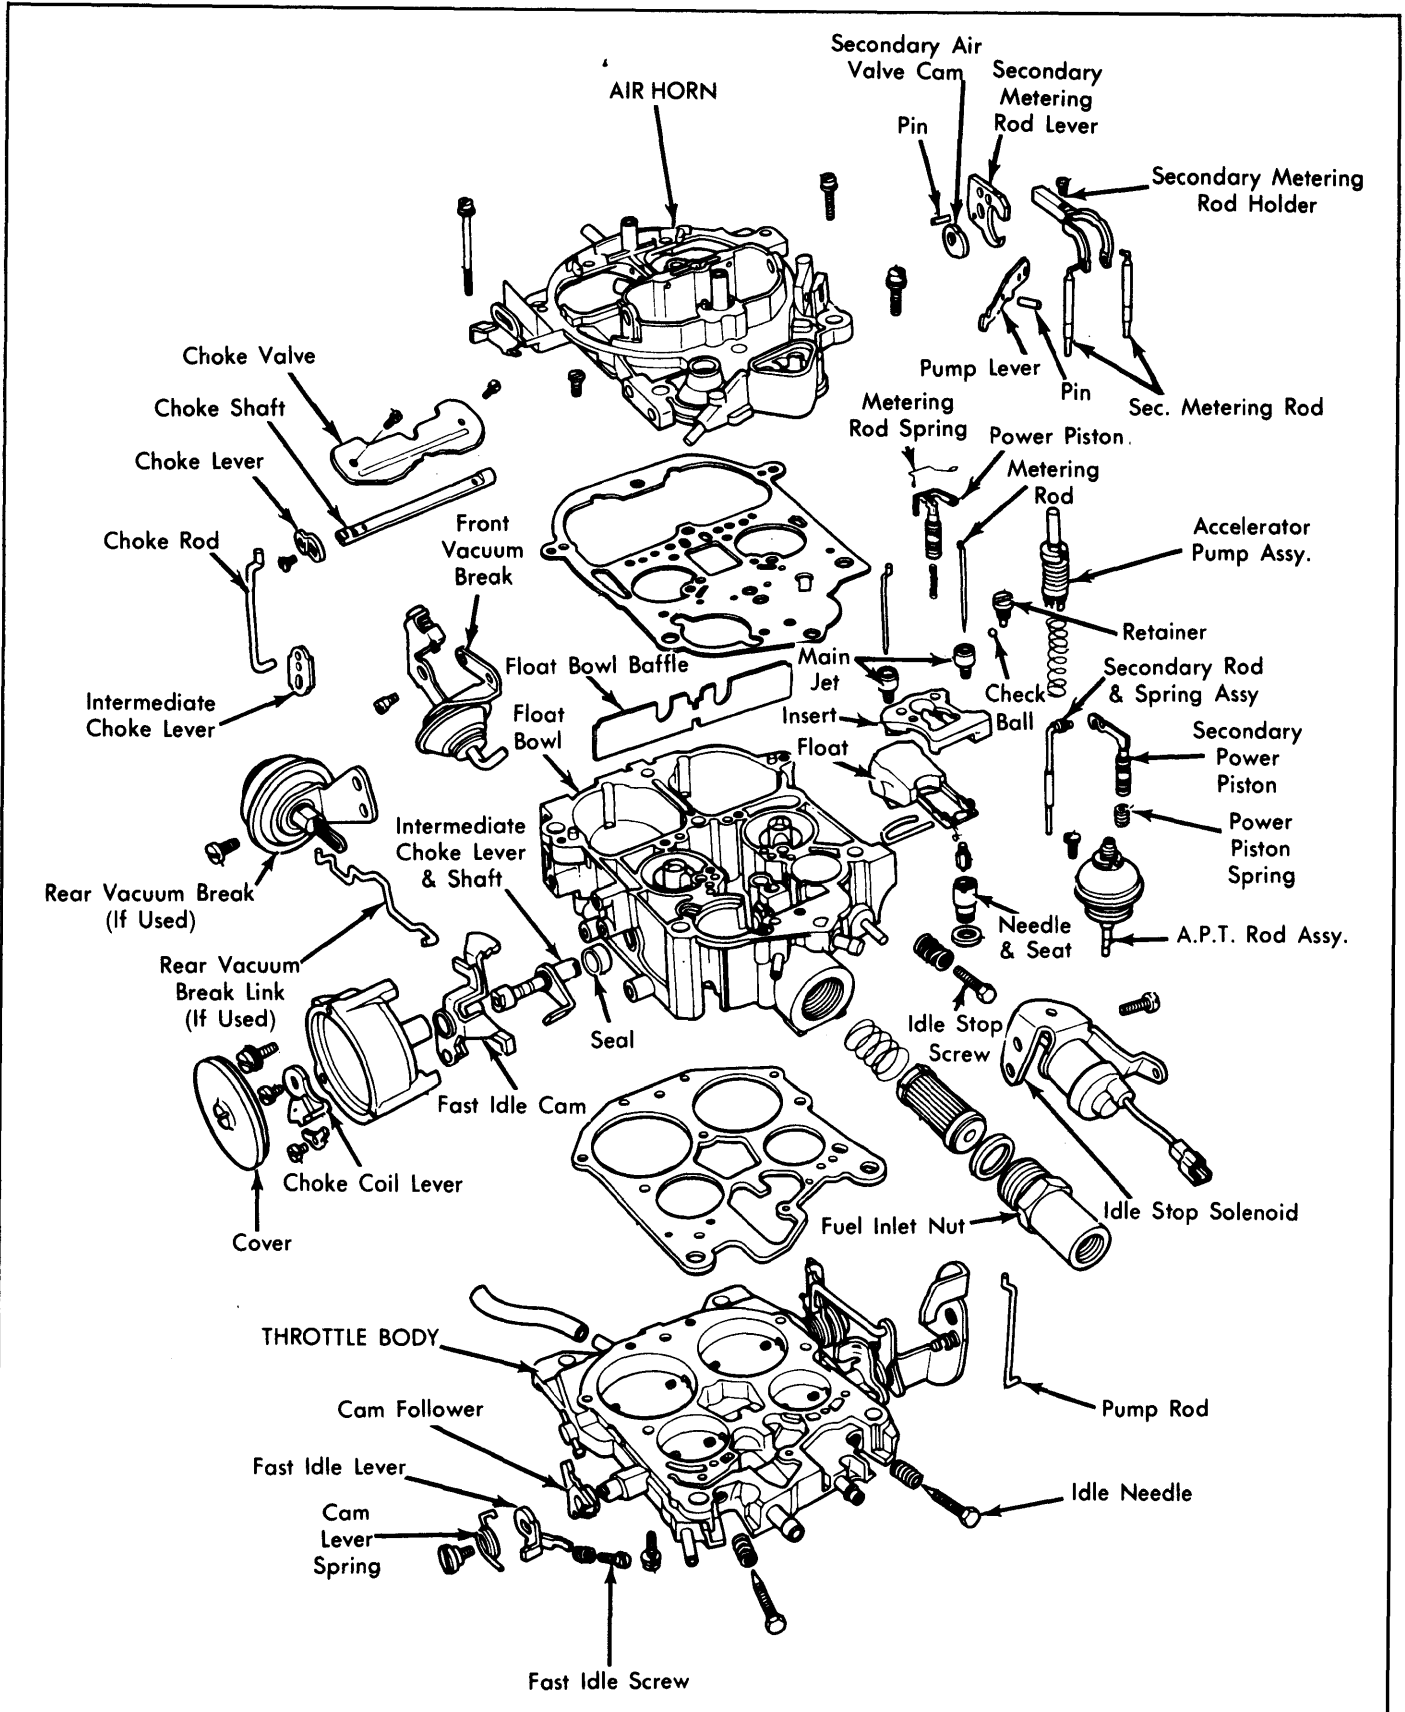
Exploded View of Rochester Model M4MC 4-Barrel Carburetor
